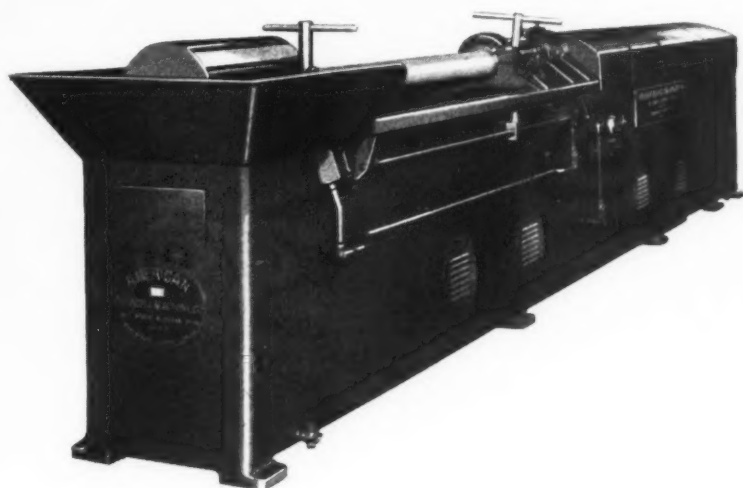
Hydraulic Gun-broaching Machine with Work Locked in Split Fixture Clamps
